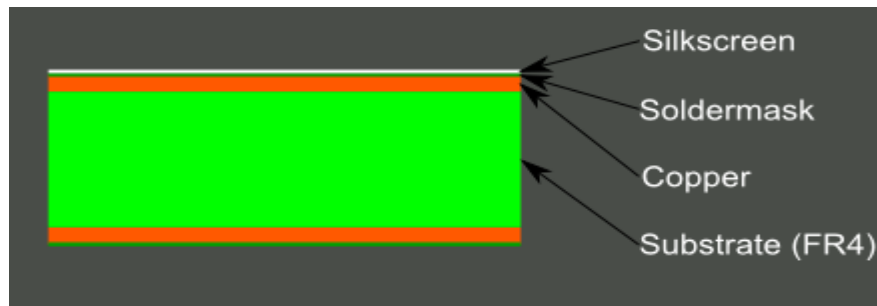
Picture showing typical layering of a 2 layer PCB. (36)
